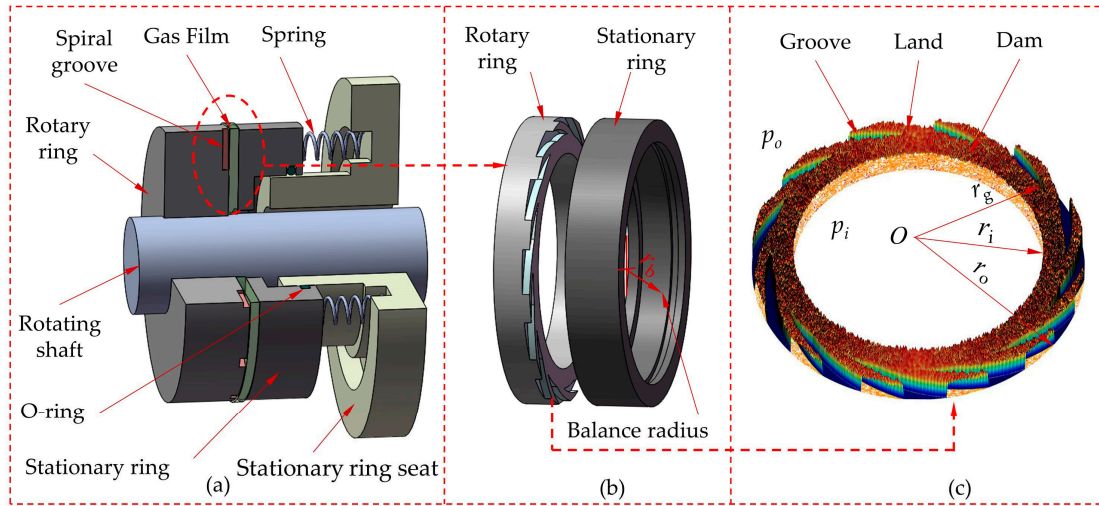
(a) The structure of DGS; (b) Seal rings; (c) The microscopic surface of seal rings.
